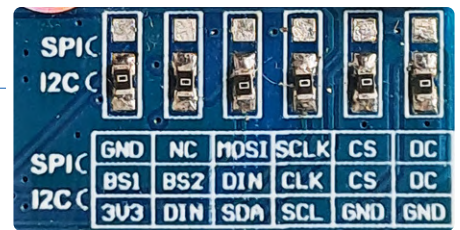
Detail of the display board, showing the correct position of the 0 Ω jumper resistors for selecting the I²C bus.
